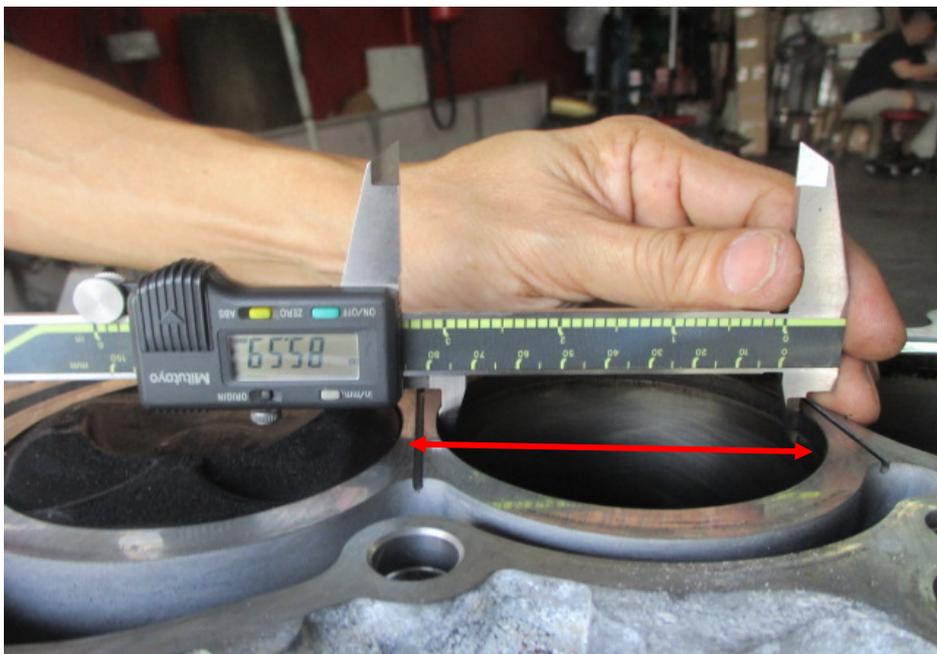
shows measurement being carried out to the bore (arrowed) of cylinder 2 of the Honda engine. The bore and stroke measurement of cylinder 2 was recorded to be 85.59mm.
